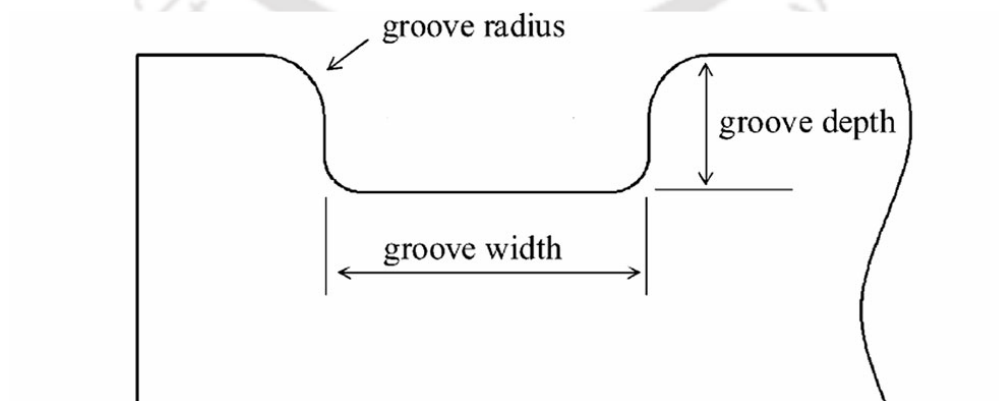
Geometrical design parameter for the groove of a form-fit joint [59]
